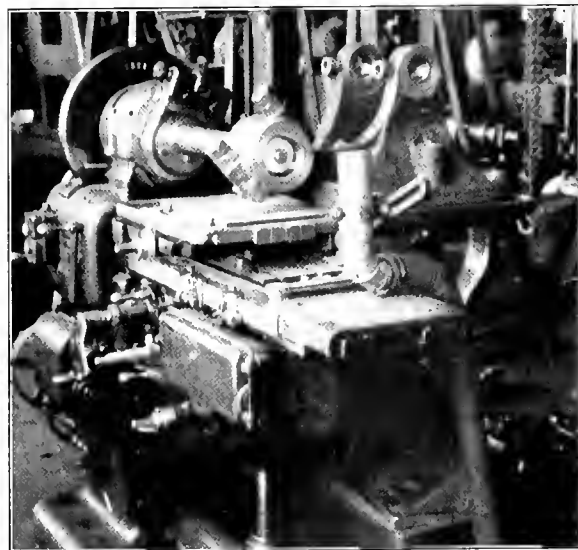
Grinding Bushings in the Link and Lift Shaft Bracket
